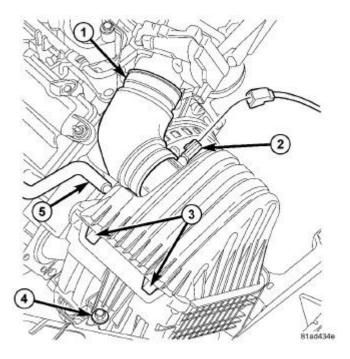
Identifying Air Cleaner Housing Components Courtesy of CHRYSLER LLC
